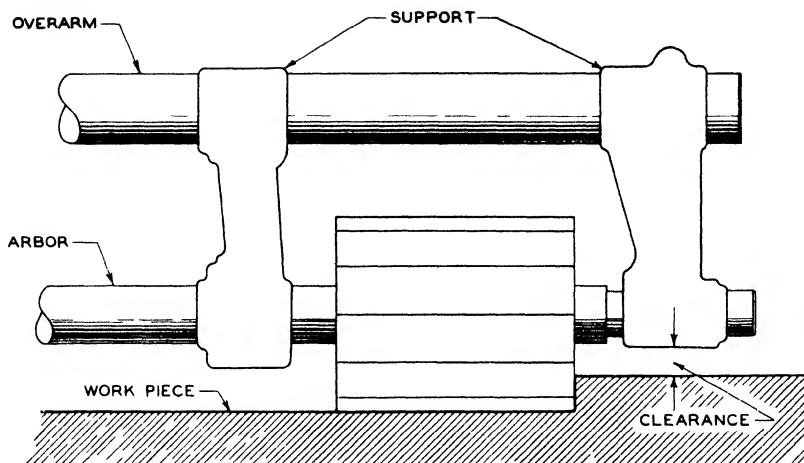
An Overarm Support Must Be Used When the Workpiece Size Requires That Milling Be Done Some Distance from the Machine
